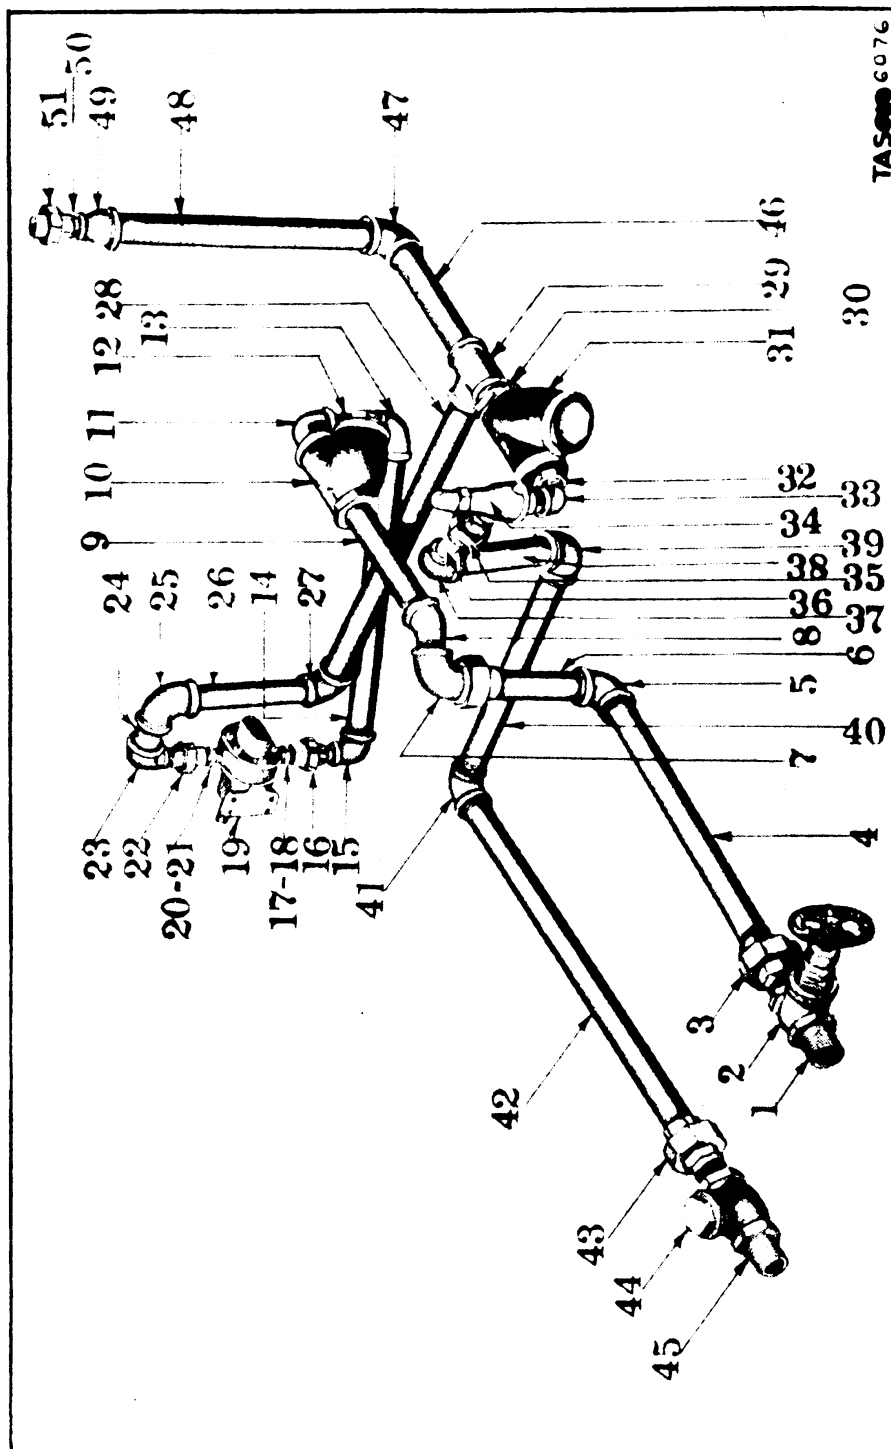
Pipe Fittings of Special Oil Suction, Discharge, and Return Lines.
